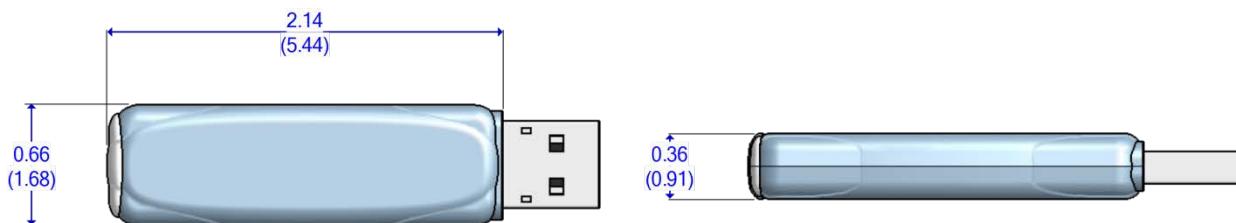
RF/USB MODULE DIMENSIONS, INCHES (CM)
